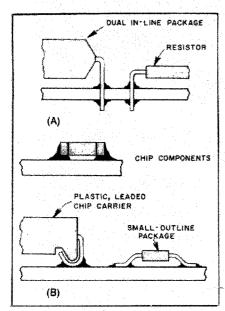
For years, the through-hole mounting of leaded components (A) has been common. Surface-mounting techniques (B) with leadless chip components and miniature IC packages are now being used in volume board assemblies.
